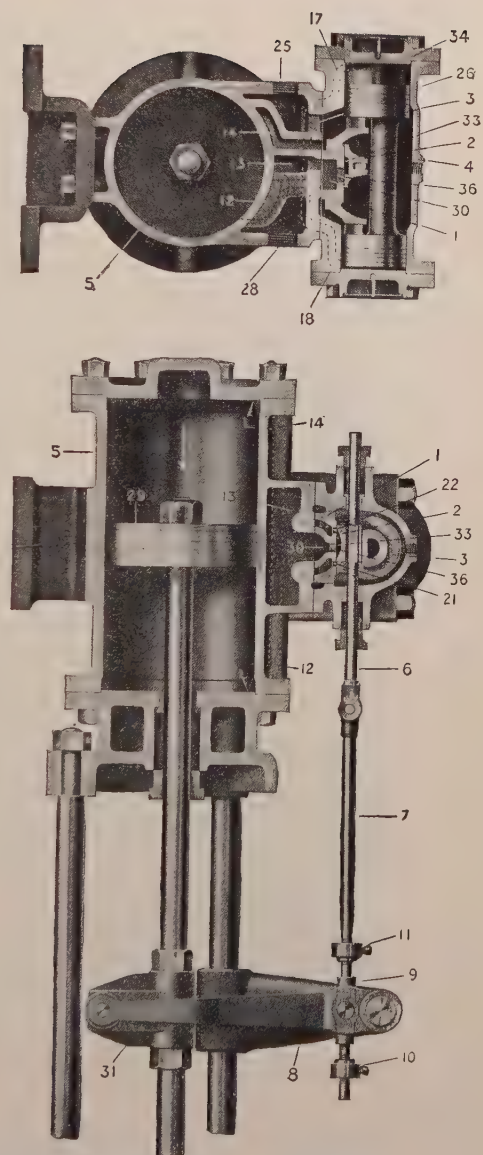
Sectional view of Vertical Simplex Style "A" Steam End. Sizes having steam cylinders up to 10 in. in diameter, inclusive.
